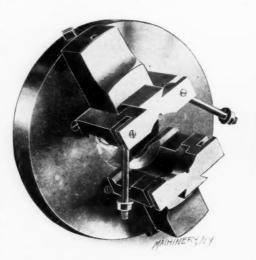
Special Chuck, provided with Jaws for Holding Gas Engine Cylinders.
